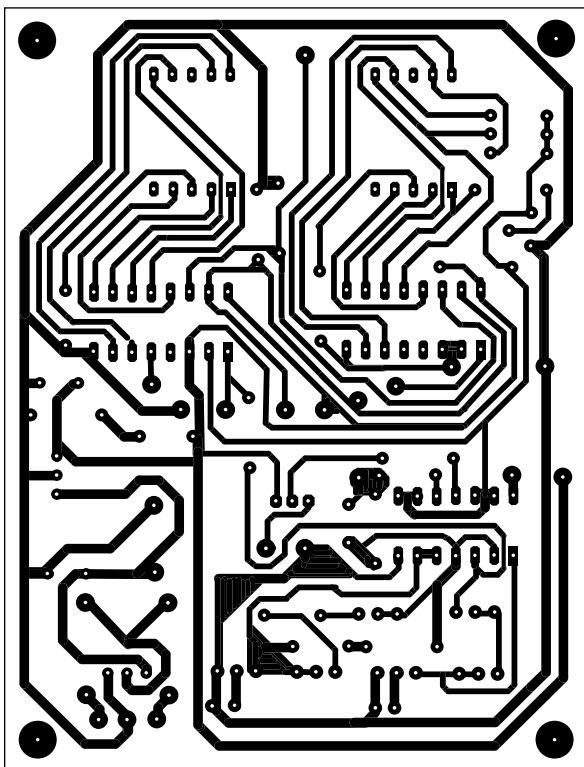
Actual-size, single-sided PCB pattern suggested for the circuit in Fig. 2
